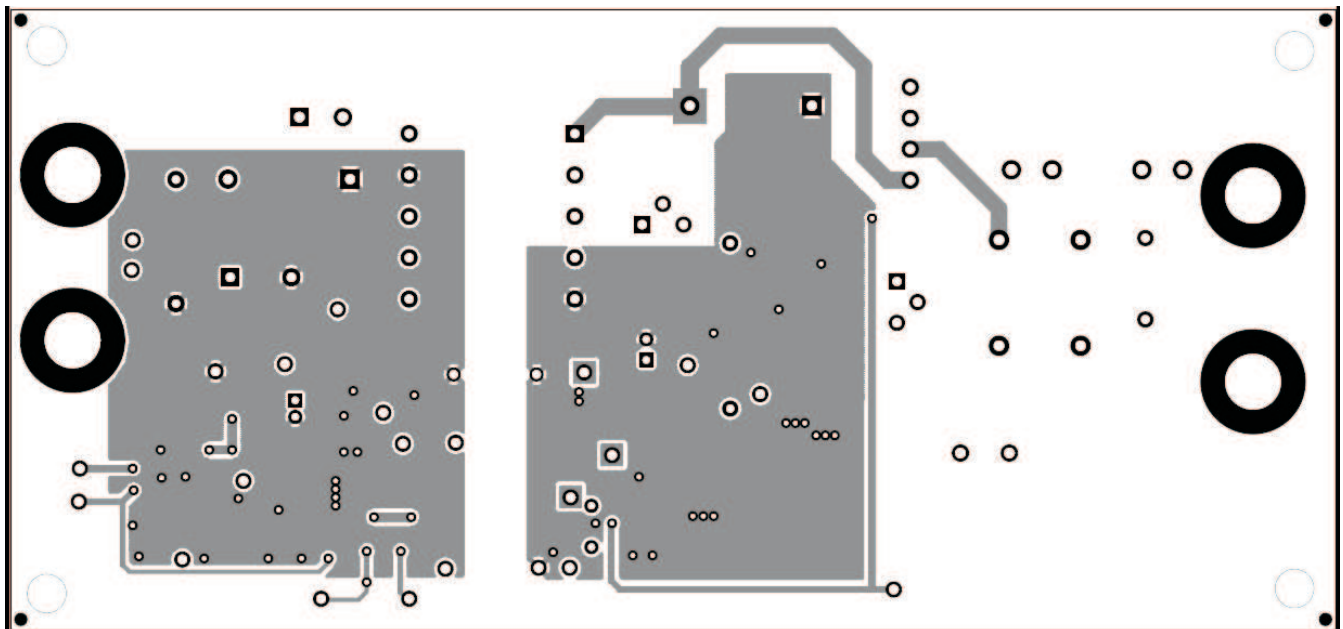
UCC28810EVM-001 Bottom Assembly Drawing (bottom view)
